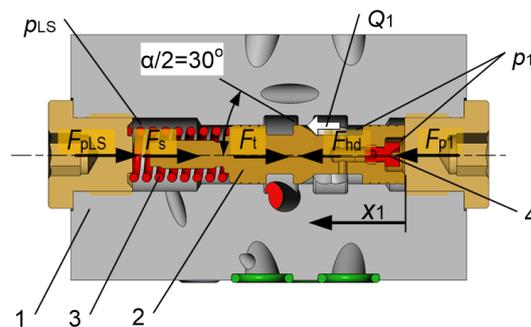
Longitudinal cross-section of the differential valve: 1—valve body, 2—spool, 3—spring, 4—damping nozzle; in, out—connecting ports, $\alpha/2$ —half of the cone opening angle, x_1 —spool position.
